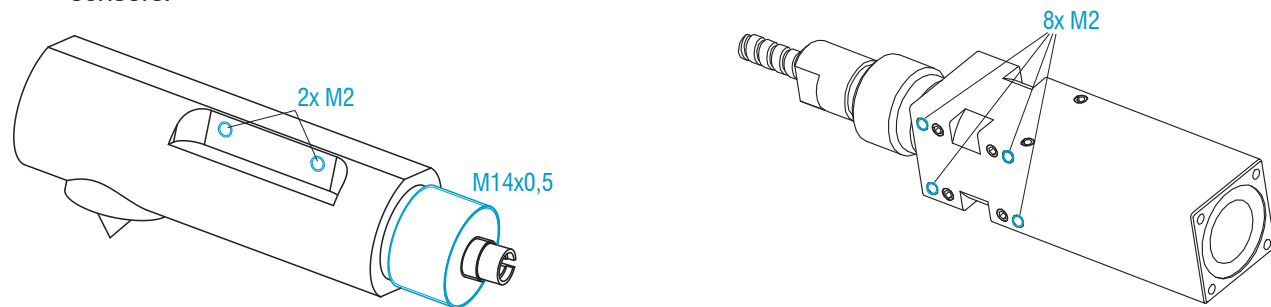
Mounting for series IFS2407/90-0,3 / IFS2407-HT sensors
